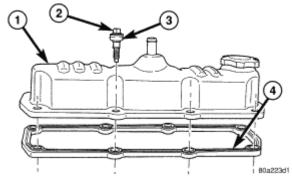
Cylinder Head Cover Gasket Courtesy of CHRYSLER LLC
